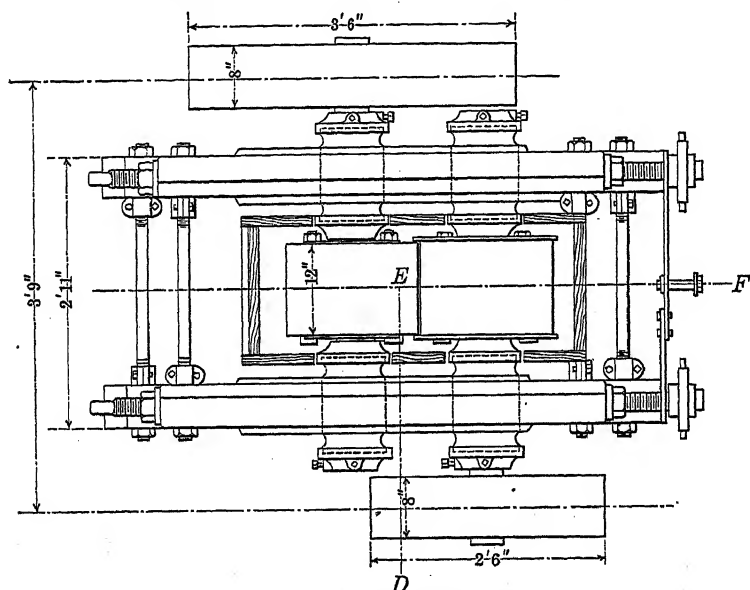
PLAN BELOW ROLL-HOUSING.
